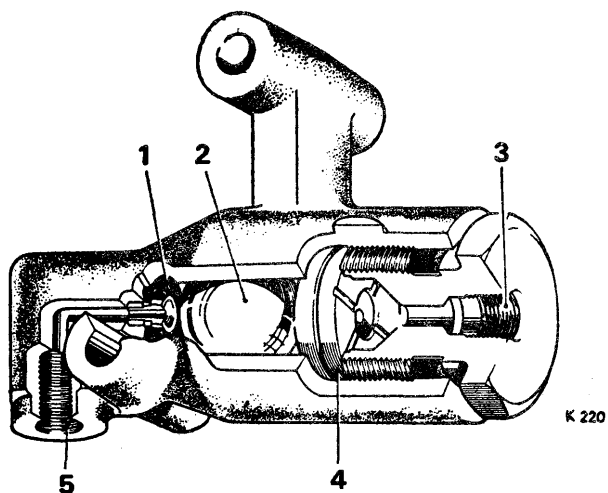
CUT-AWAY VIEW—PRESSURE LIMITING VALVE
